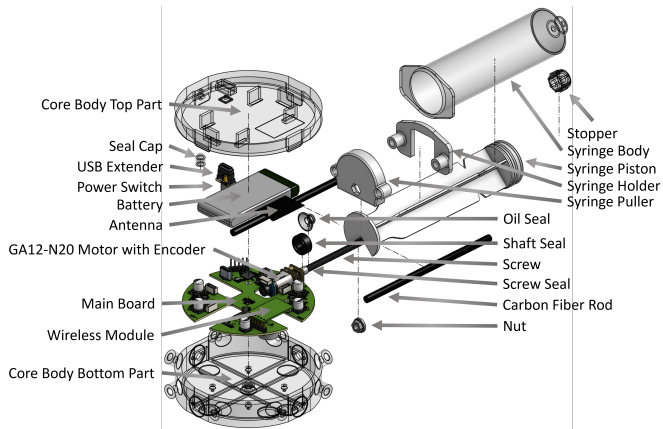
Exploded assembly view of the core body and one syringe buoyancy engine, highlighting the actuation transmission and sealing components used to maintain water tightness.
